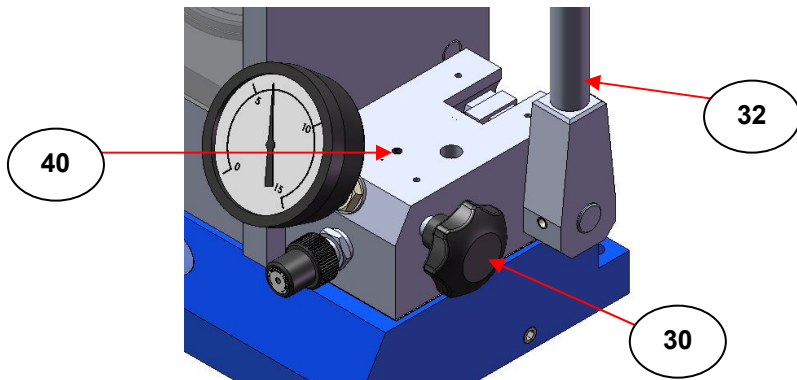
Bleeding Air from the Oil in the Pump Block Assembly
